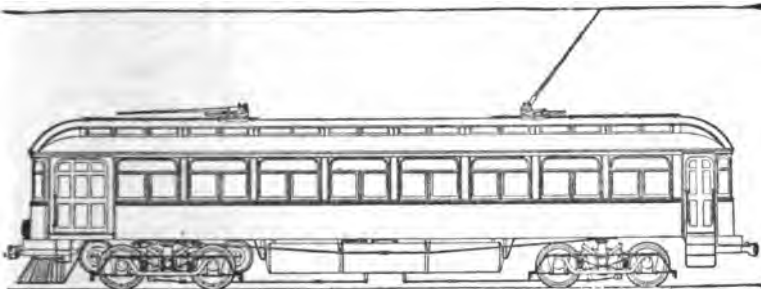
DRAWING OF CAR OF LANSING, ST. JOHNS & ST. LOUIS ELECTRIC RAILWAY.
